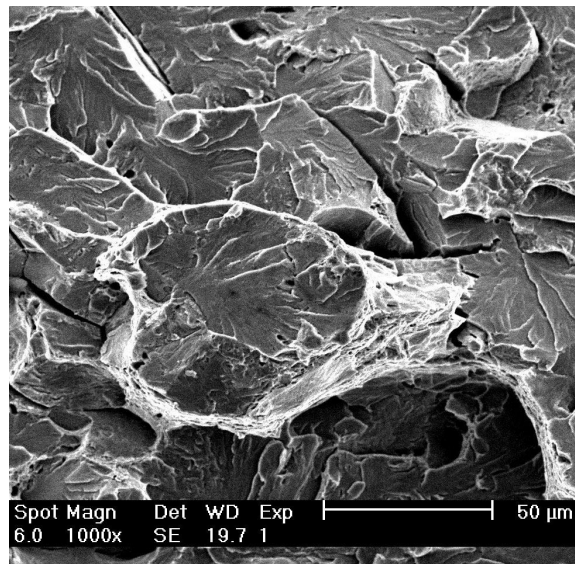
(c) - FF (cleavage) observed within a LIST fracture surface
